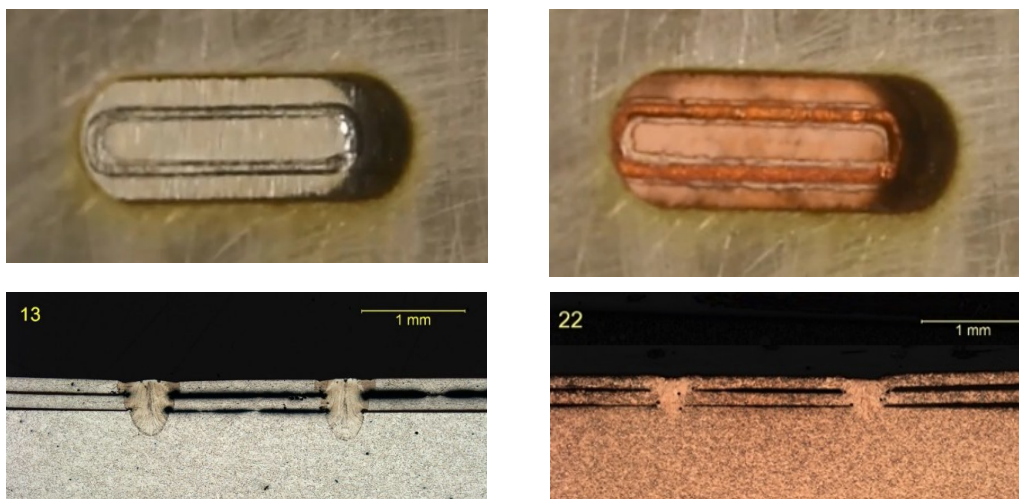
Photographs of stack-welded collector tabs showing top views (top images) and cross-sectional side views (bottom images).
